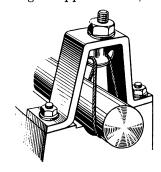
Tool for lifting the shafts of large and medium-size machines to a small height
